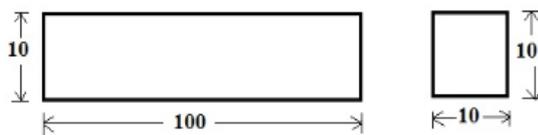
Dimensions of the Specimen as Per ASTM D790 for Three-Point Bend Test.
